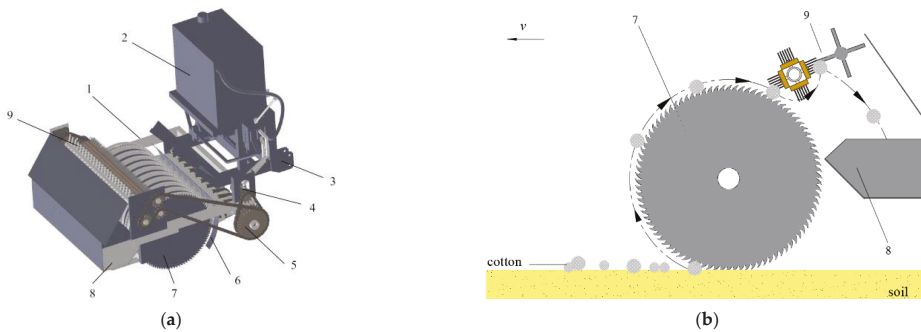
Cotton recovery device: 1. frame; 2. hydraulic device; 3. hangers; 4. hydraulic motor; 5. sprockets; 6. straw shield; 7. sawtooth roll-tie cotton-picking mechanism; 8. cotton collection box; and 9. cotton unloading mechanism. (a) Structure diagram of the cotton recovery device. (b) Schematic diagram of the principle of the cotton recovery device.
